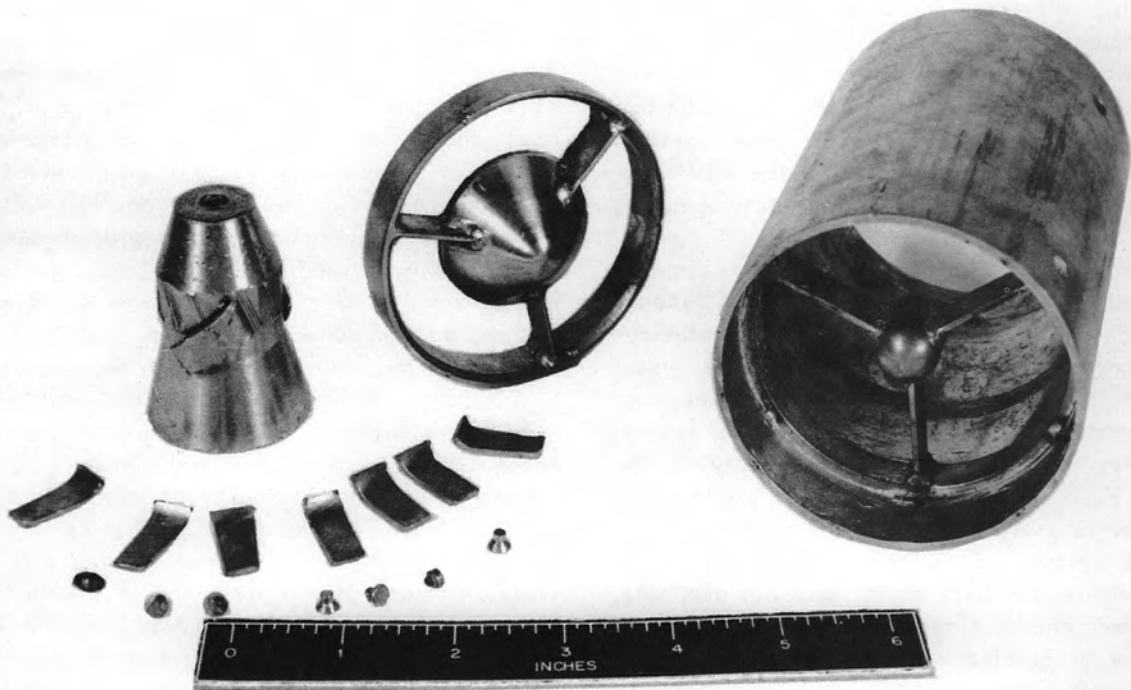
Damaged Turbine-Type Magnetic Flowmeter, 3½-in. Model, Exploded View.
